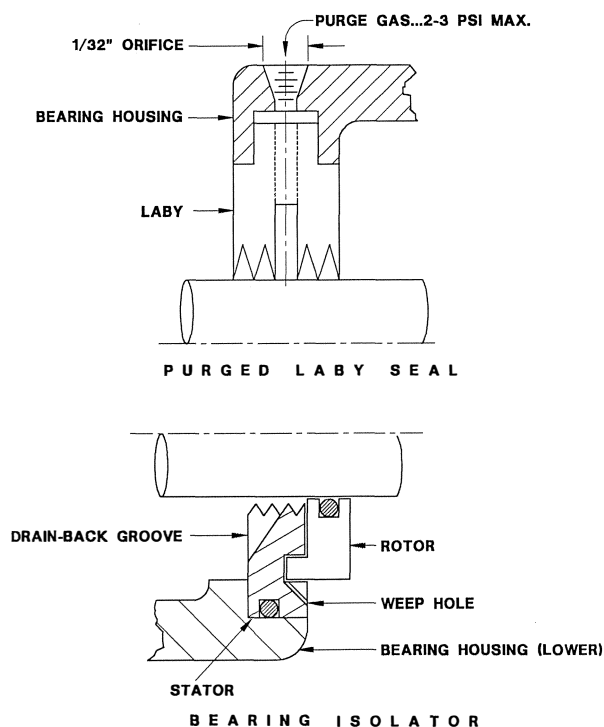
Purge and Isolator Type Bearing Housing Seal Details.
